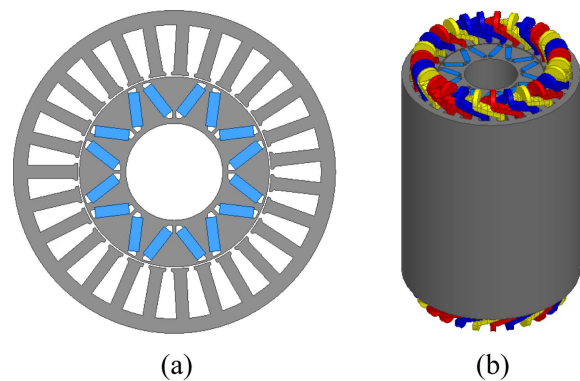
(Color online) Optimized V-shape IPM machine. (a) 2-D section. (b) 3-D structure.
